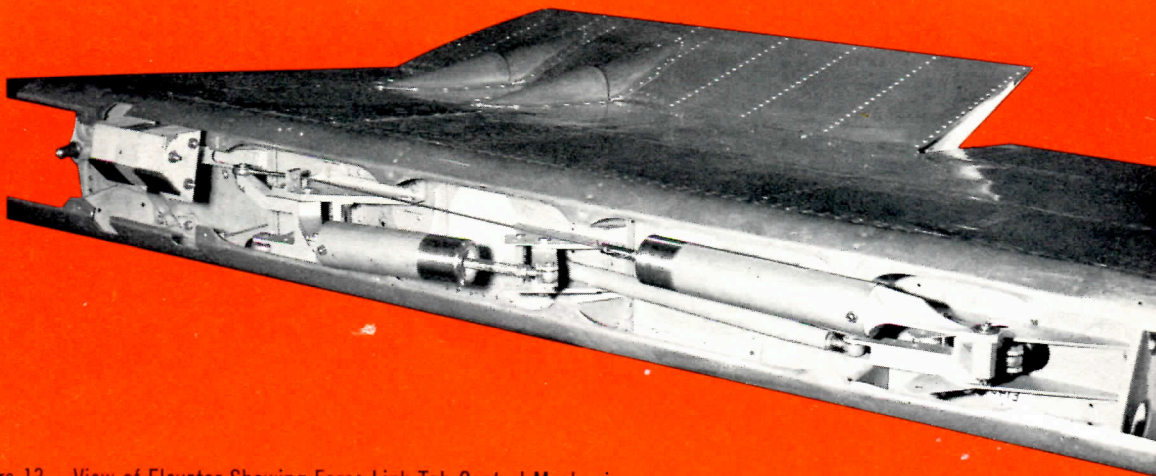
View of Elevator Showing Force Link Tab Control Mechanism
